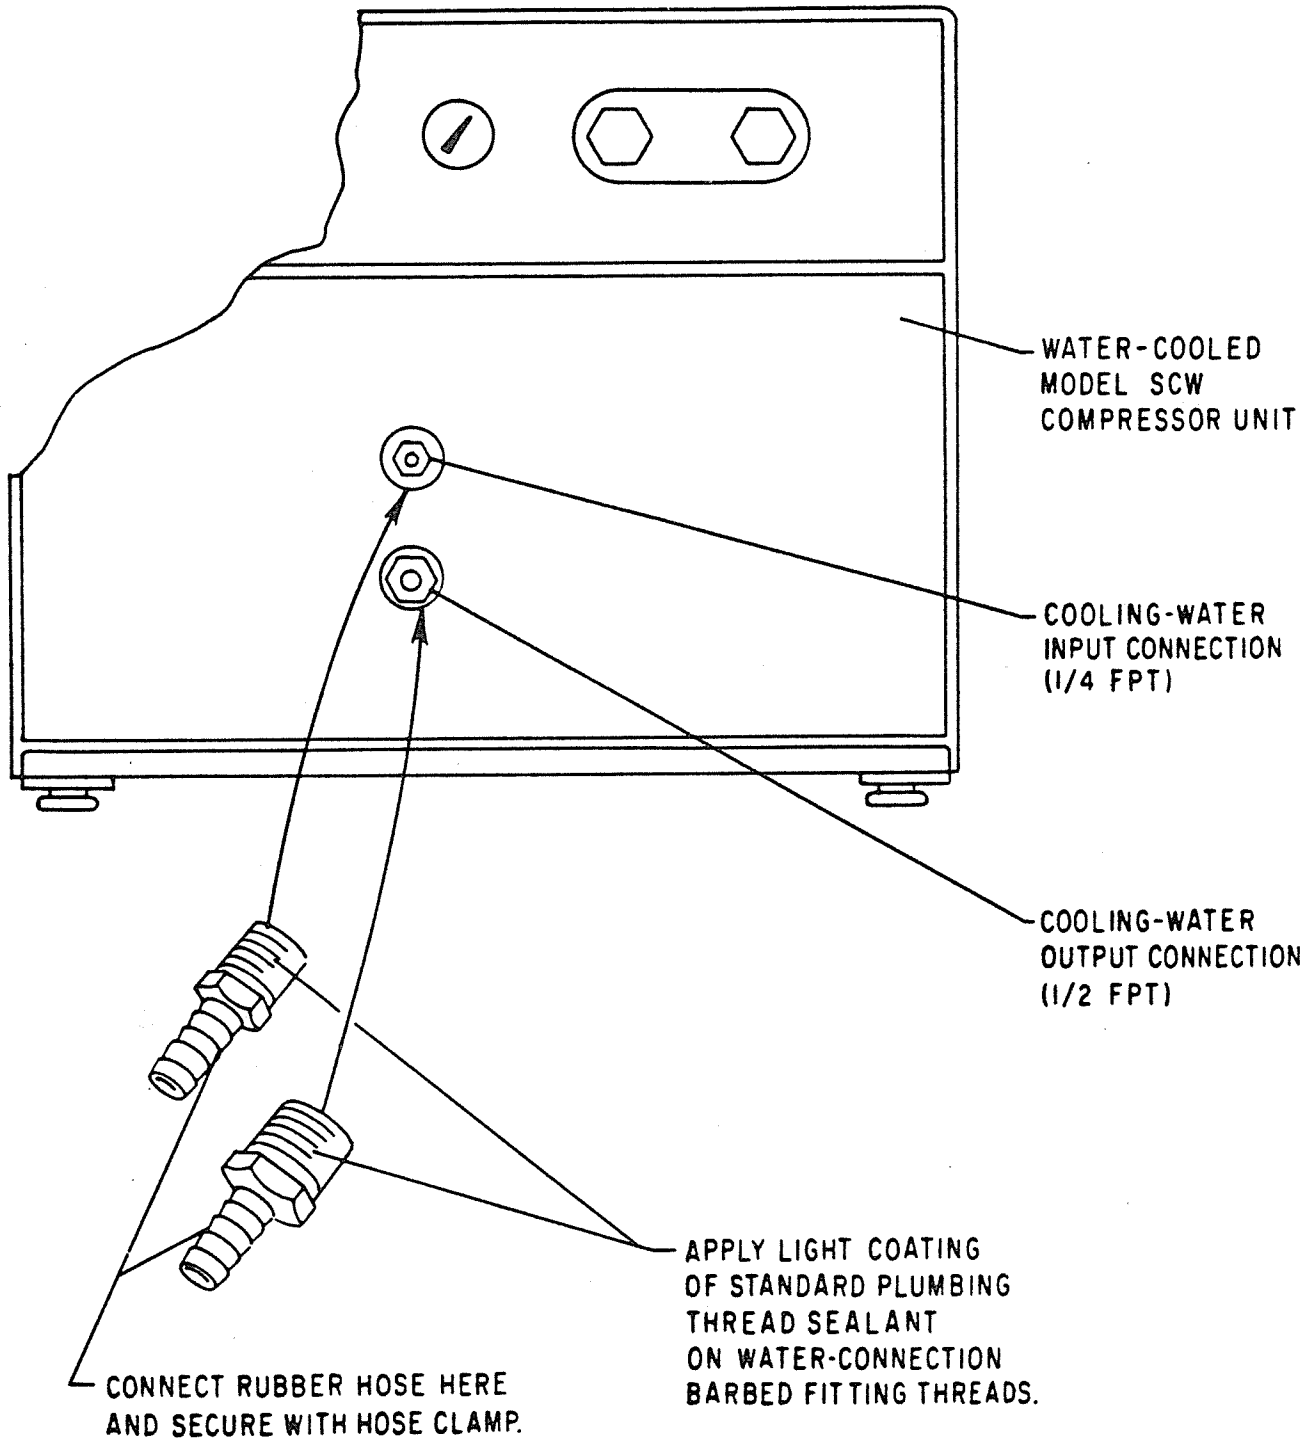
WATER-CONNECTION BARBED FITTINGS USED ON
